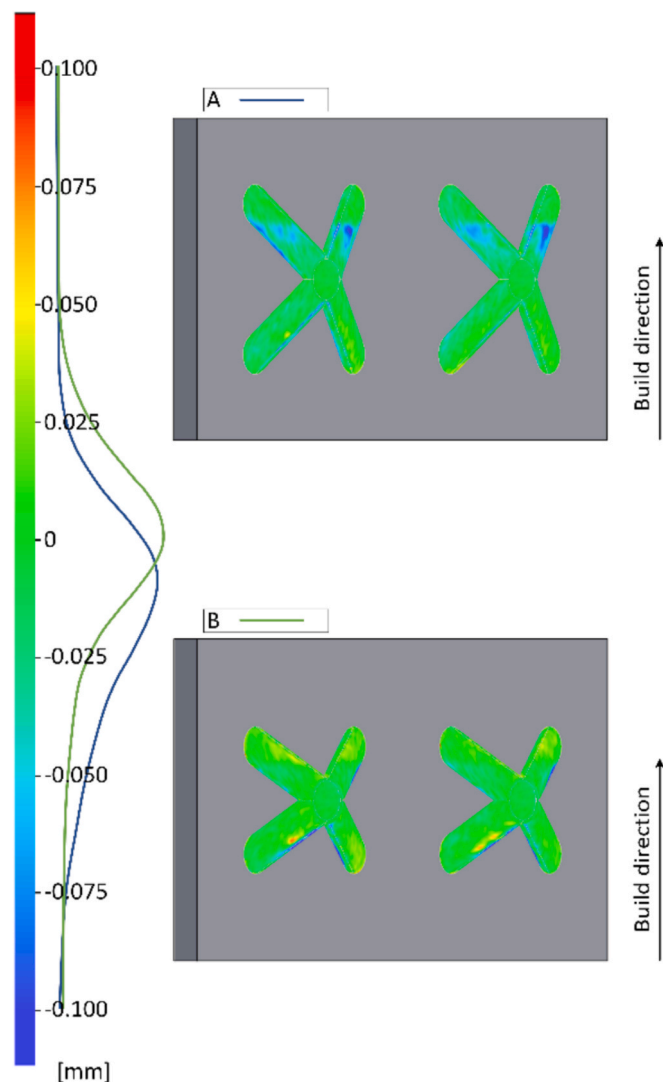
Dimensional error of the A-BCC and B-BCC configurations determined by examining the sectioned samples with the laser scanner.
